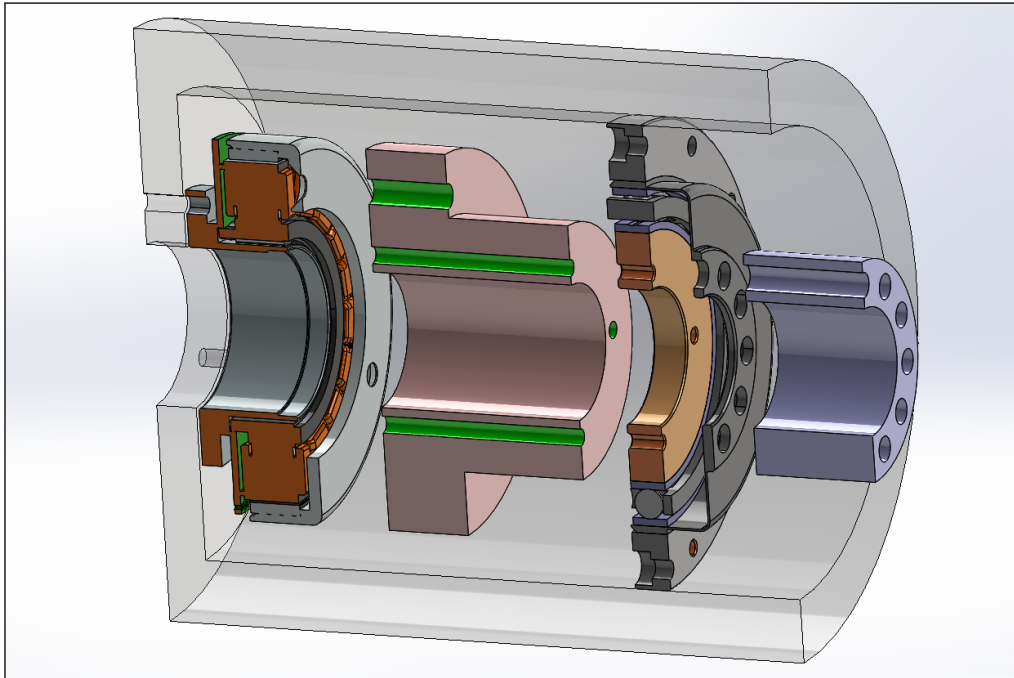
Drive concept exploded view section. From left to right: motor, motor shaft (light red), harmonic drive gearing, output shaft (light blue). Components are housed inside a schematic casing (gray, transparent).
